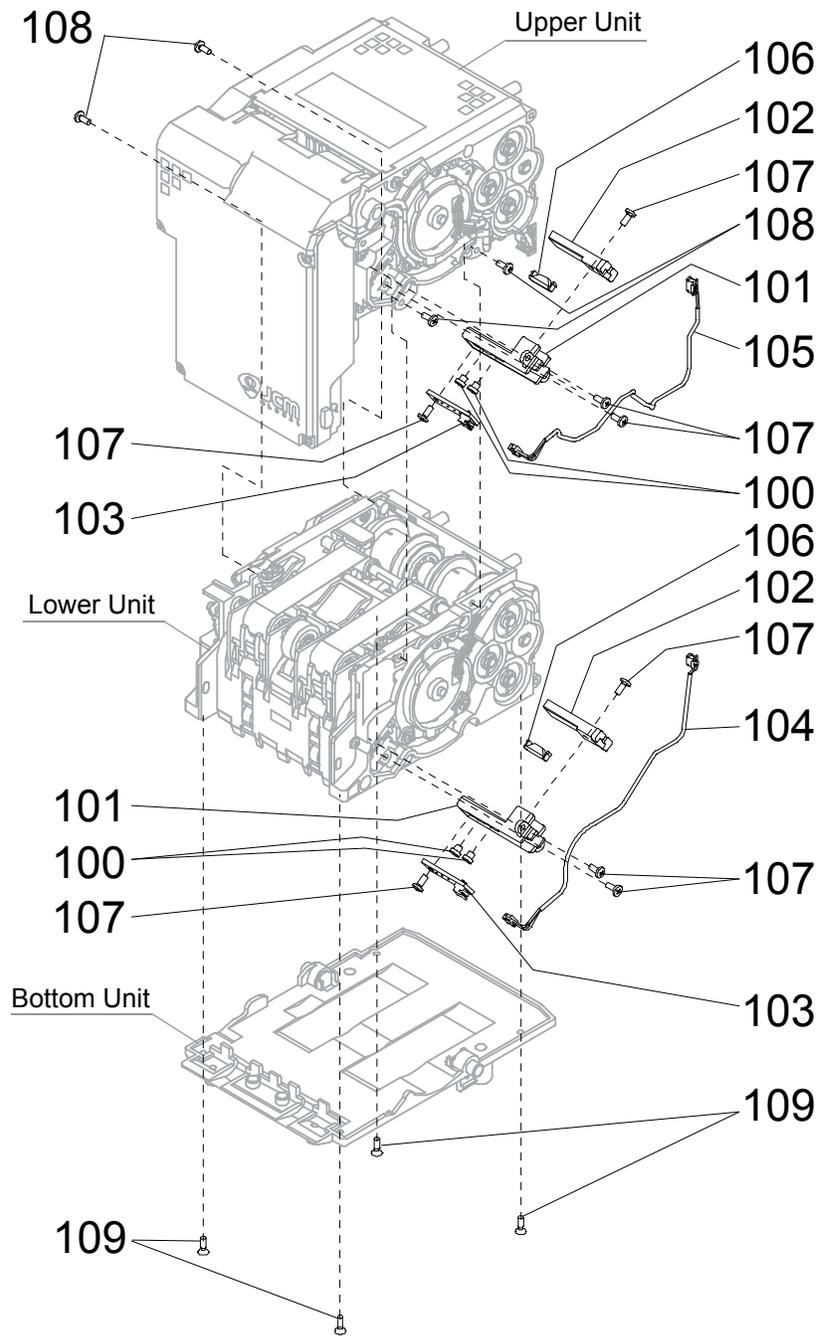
Entire VEGA-RC Twin Unit Exploded View
